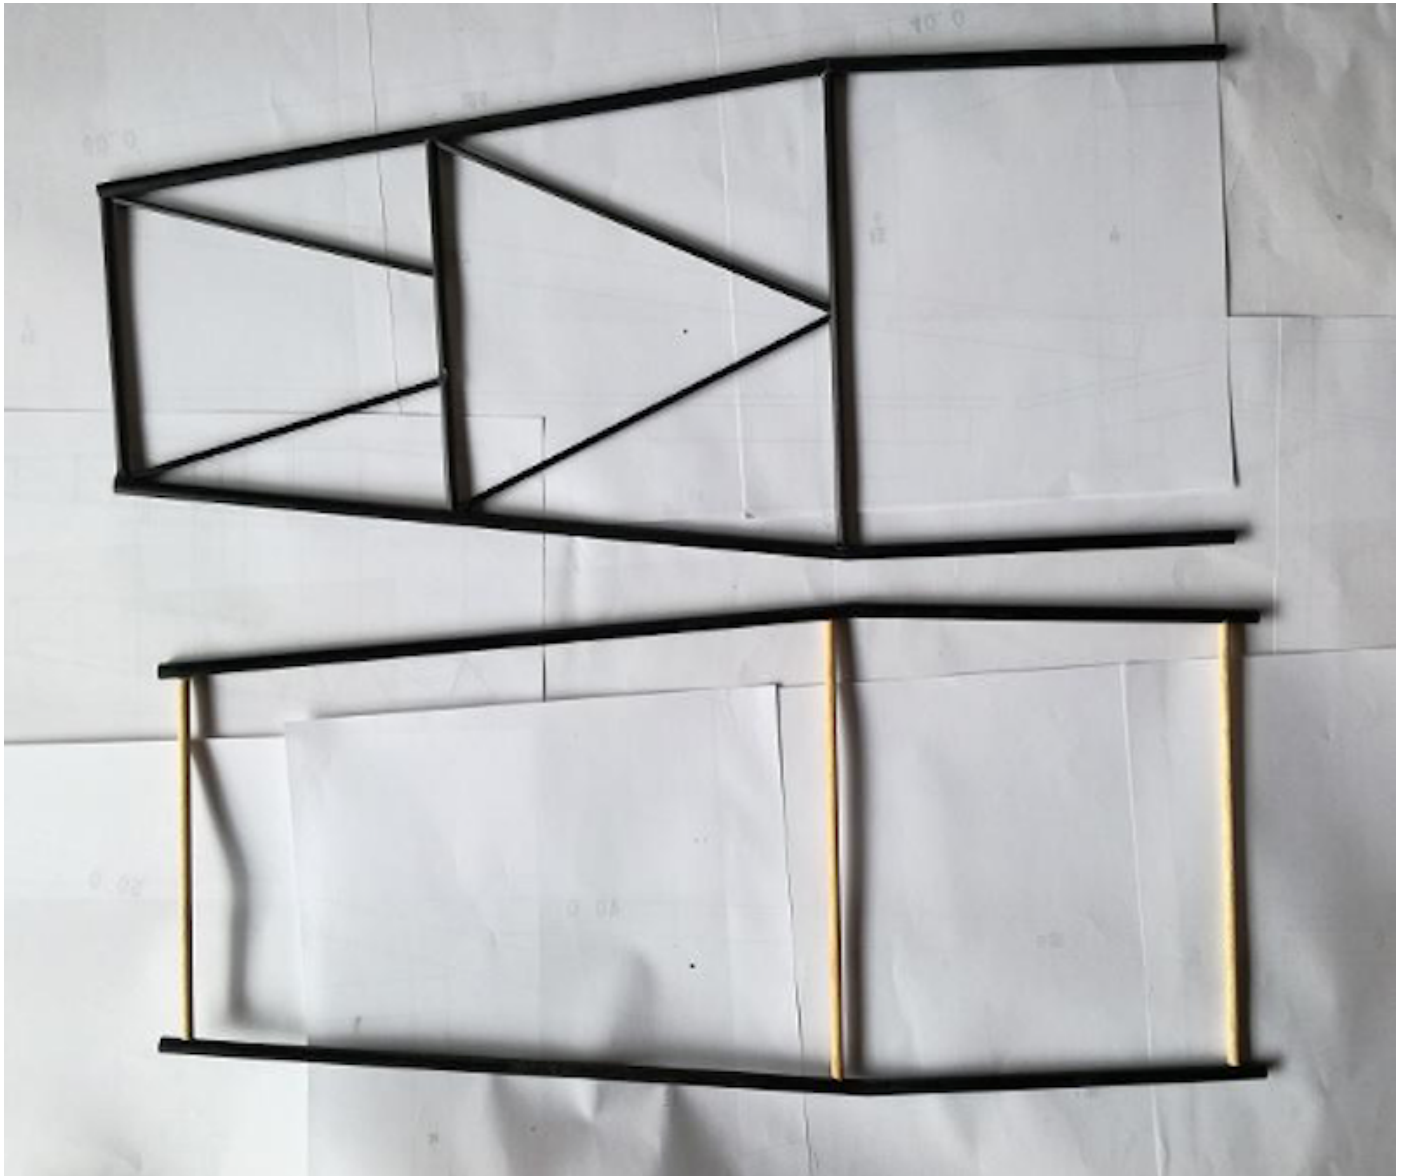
Cockpit floor structure (top) and canopy sill (bottom).
